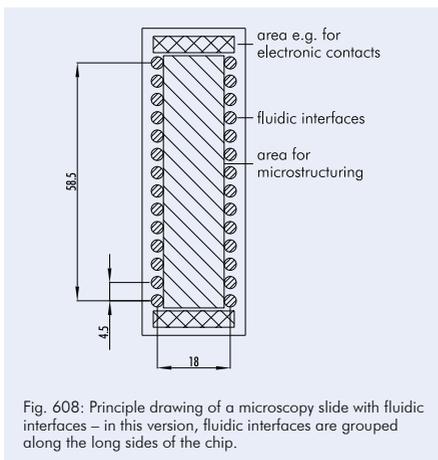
Principle drawing of a microscopy slide with fluidic interfaces – in this version, fluidic interfaces are grouped along the long sides of the chip.
